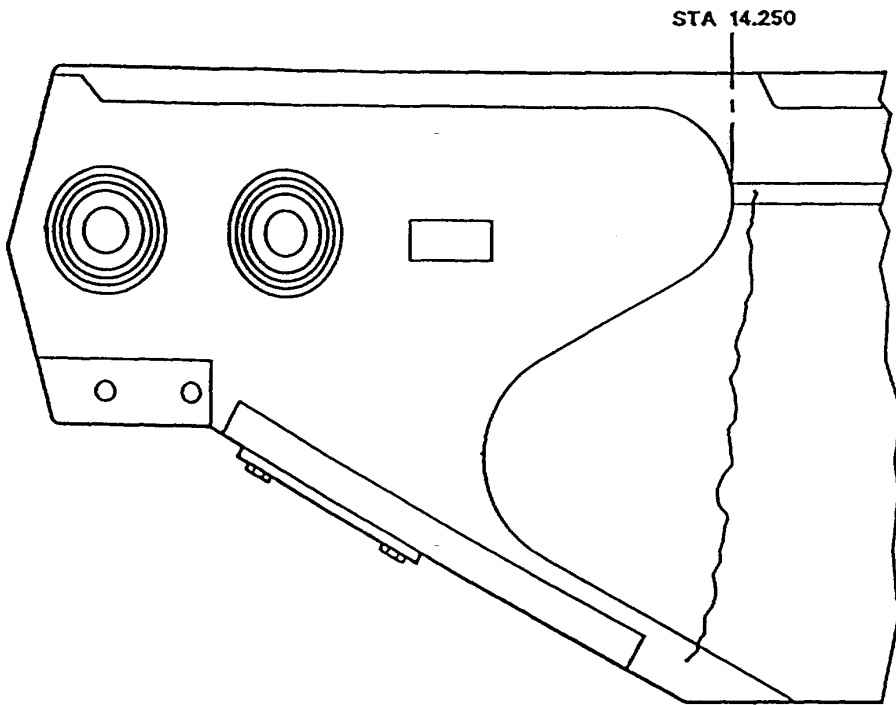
SKIN CRACK IN TAIL ROTOR BLADE
